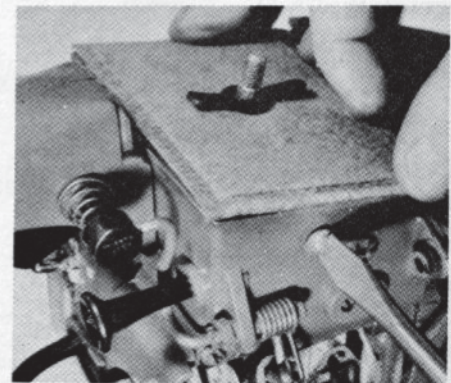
Before tightening screws retaining air filter bracket in throttle handle, place air filter element on bracket stud and align filter with edges of air box.
